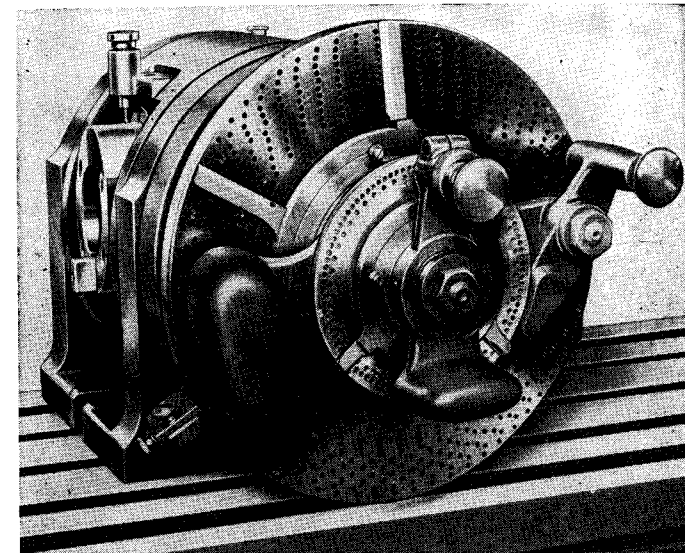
The Cincinnati universal index head with a wide-range divider. (The Cincinnati Milling Machine Company)
